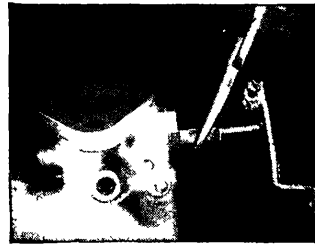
Install throttle shaft and lever. Back out throttle lever adjusting screw
